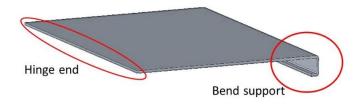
485mm wide plate describing the jointed hinge end and the bending support.
